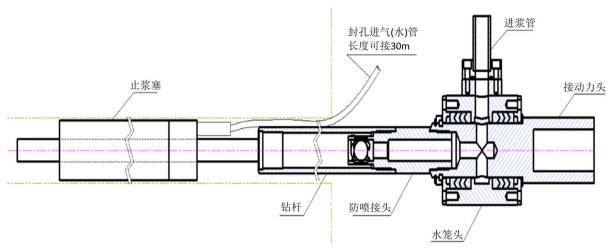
Drilling tool of grout injection 图 2. 注浆钻具
